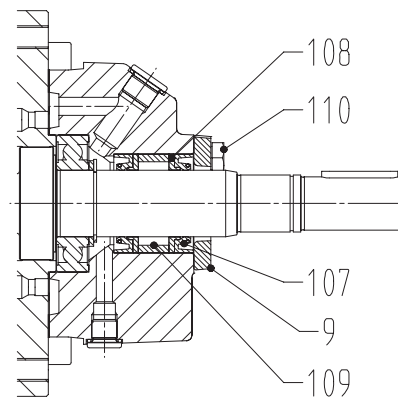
SN..ER..U3, internal bearing, two shaft seal rings
